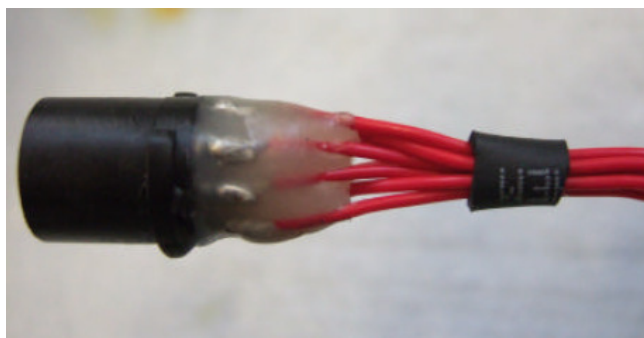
'Potting' of signal wire soldered joints to prevent fatigue failures
